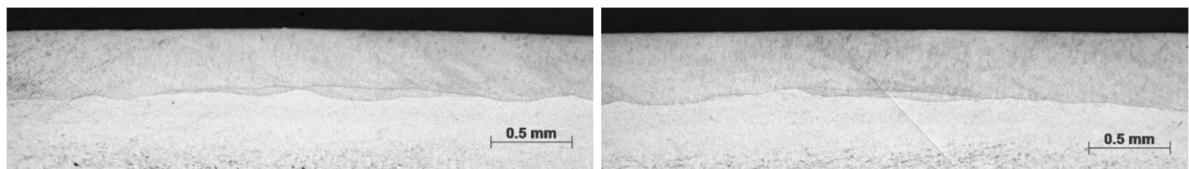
Two longitudinal sections illustrating the depth of penetration. The actual location of the section in the weld cannot be determined due to the applied measurement technique.
